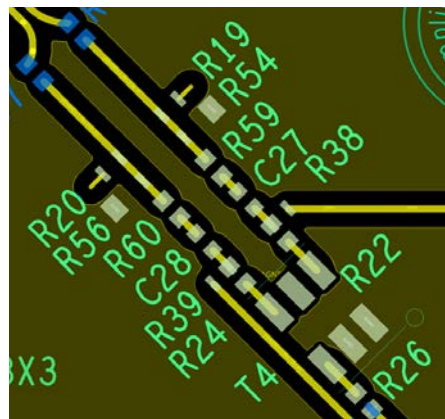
Layout of Channel 2 Output Showing Pad Locations
